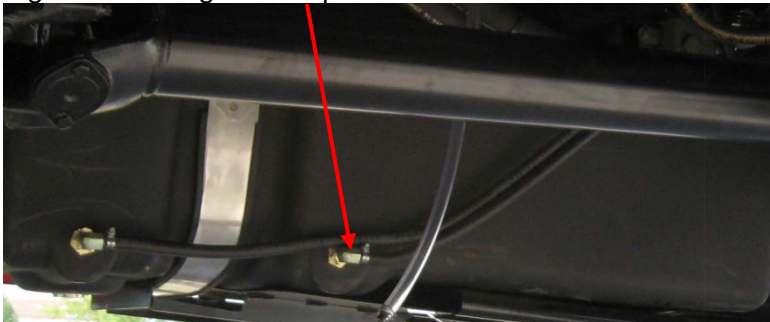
1/2" STOR x 3/8" hose barb 90 degree tank fitting
